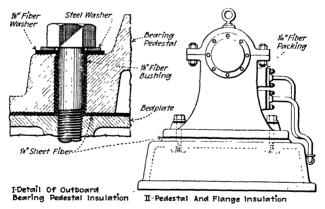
Methods of insulating the bearings of a turbo-generator unit to prevent eddy currents from pitting them.
